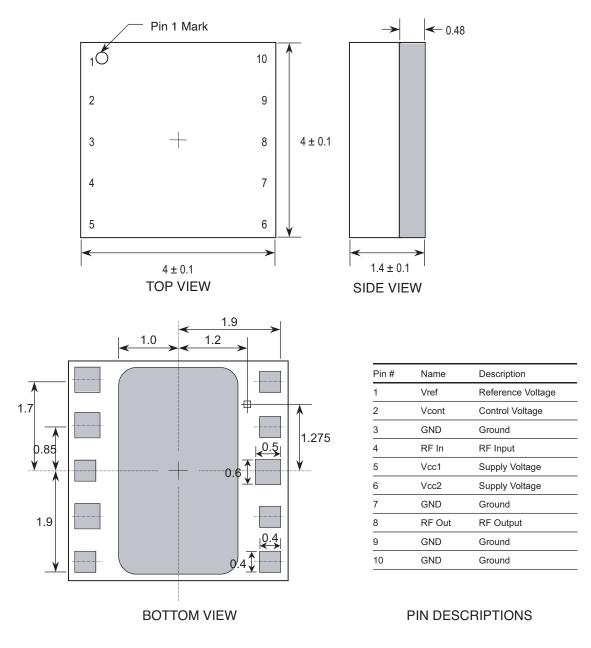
Package Dimensional Drawing and Pin Descriptions (all dimensions are in millimeters).
